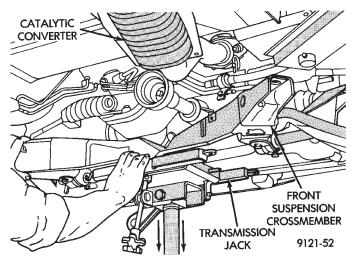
Lower Crossmember Assembly and Remove CAUTION: A certain amount of oil will drain out of the transaxle when the drive shaft is removed.
